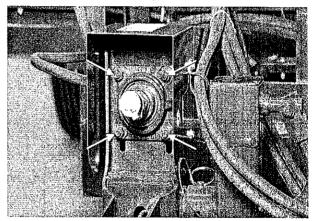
PTO Driveline Bearing. A rrows Indicate Mounting/A djustment Bolts.
